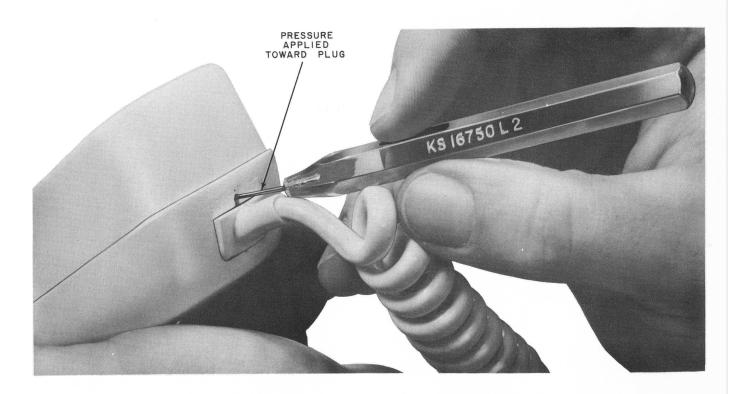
Removing Cord from 220A Hand Telephone Set
